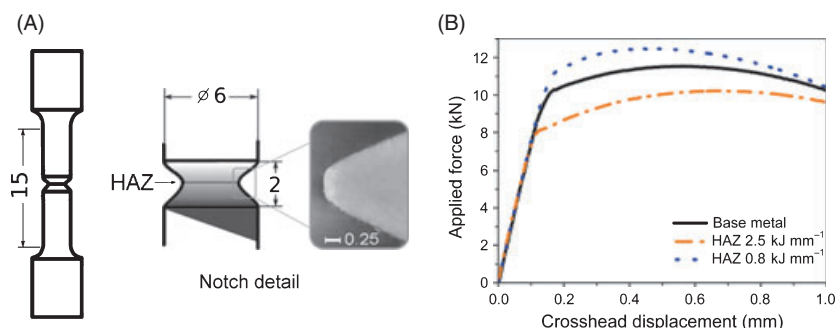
(A) Tensile tests notched specimens obtained from the centre part of the weld (cap and root were removed); dimensions are in millimeters. (B) Experimental results for notched specimens
